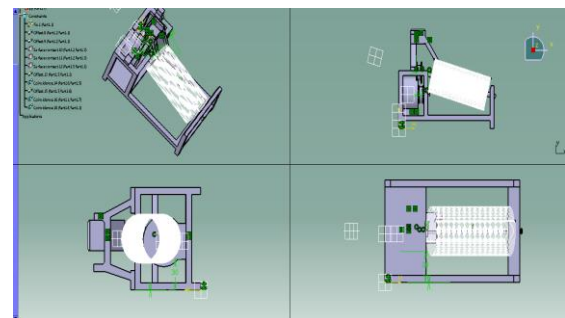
Design of Rotary Sand Screening Machine in CATIA 2
